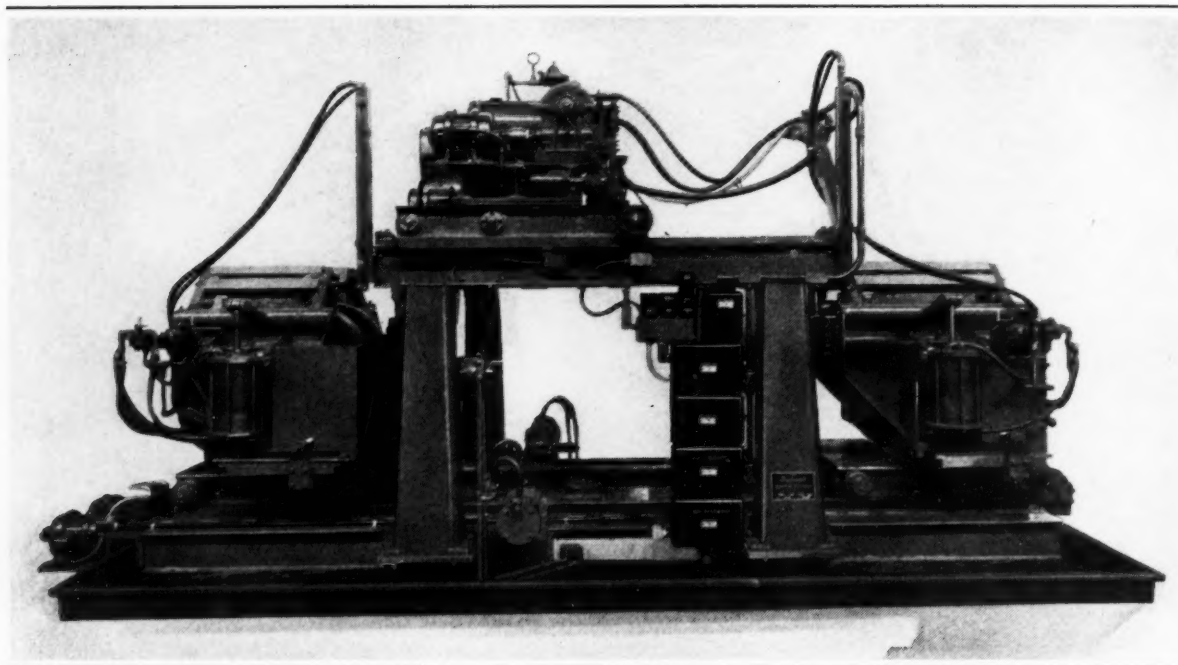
A Duplex Type Machine Making Use of Two Welding Fixtures, One of which is Loaded while the Other is Passing through the Welding Cycle
